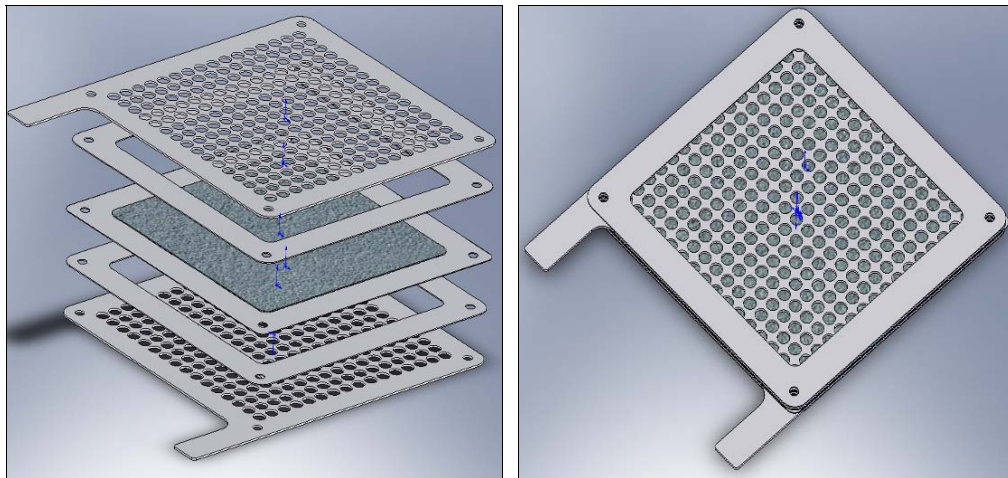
3D CAD model of the membrane electrode assembly (MEA) with perforated stainless steel gas flow distributors
